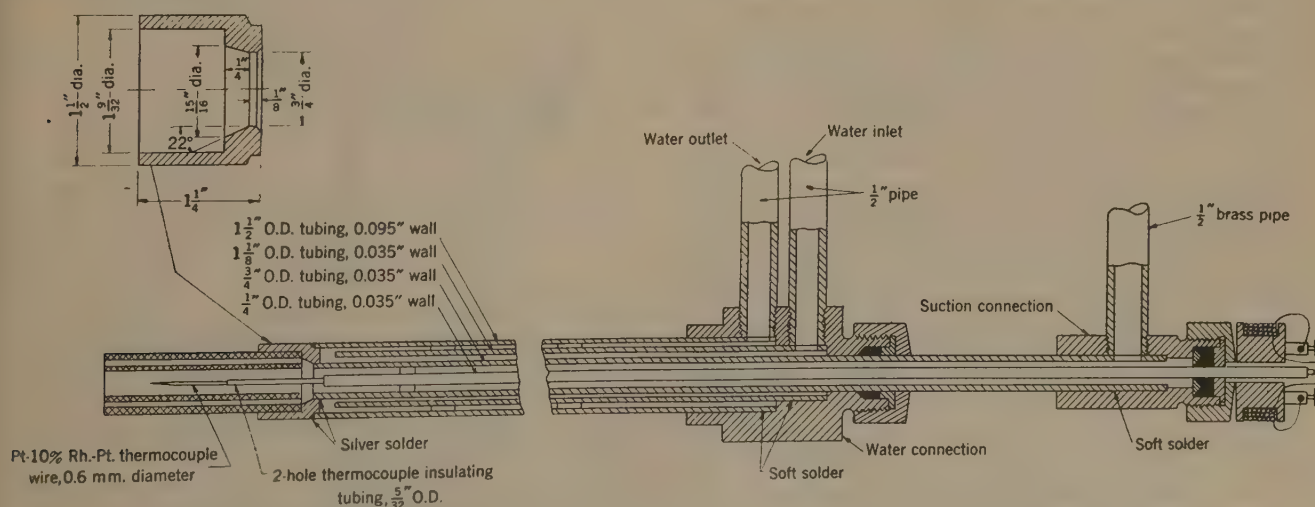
ASSEMBLY DRAWING OF WATER-COOLED HIGH-VELOCITY THERMOCOUPLE PROBE
